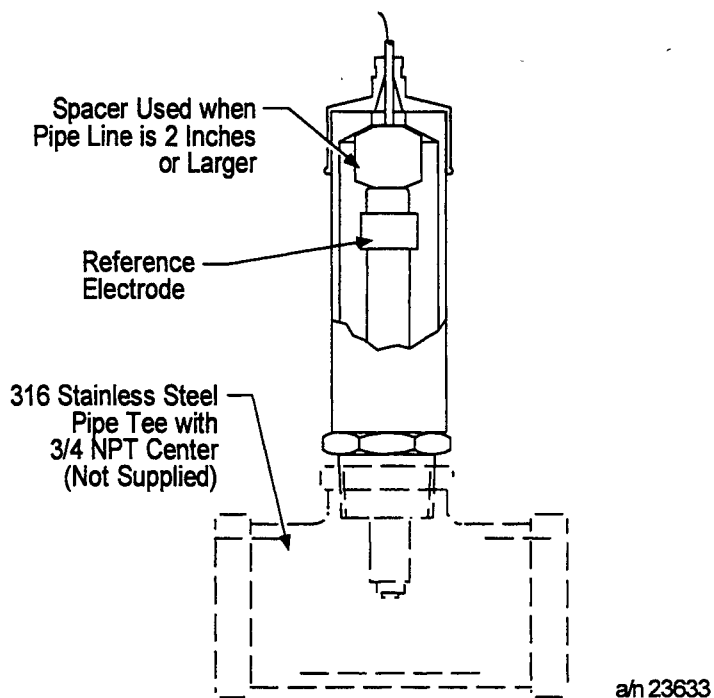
Assembled Mounting Using a Reference Electrode (For larger pipes, the spacer above the electrode provides greater depth of insertion)
